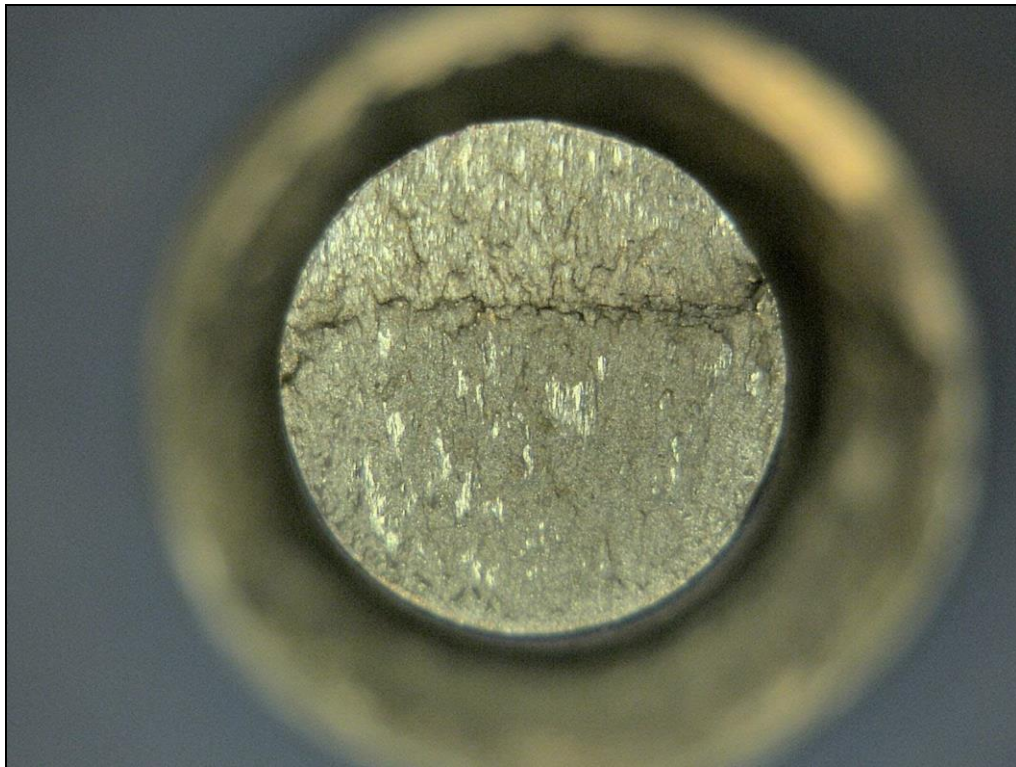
Main PCU lower bracket fastener shear (*NTSB*)
